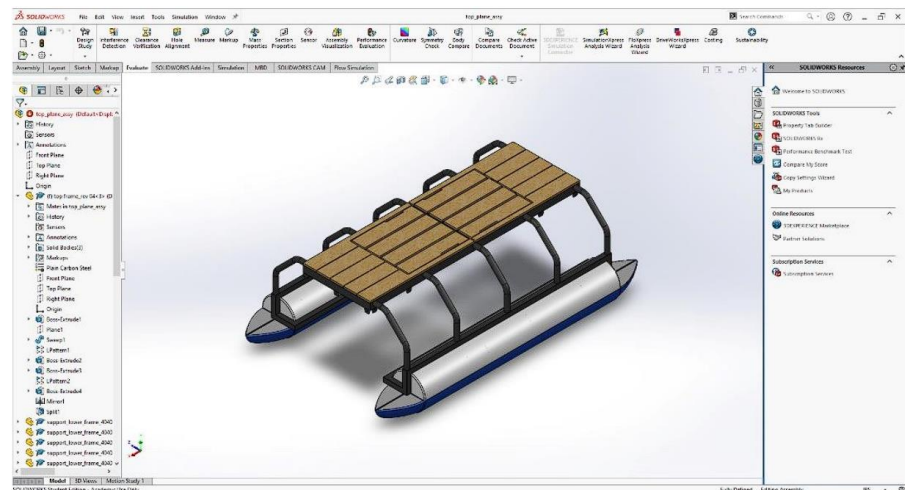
Drawing of RTCS MK IV top frame in SOLIDWORKS
